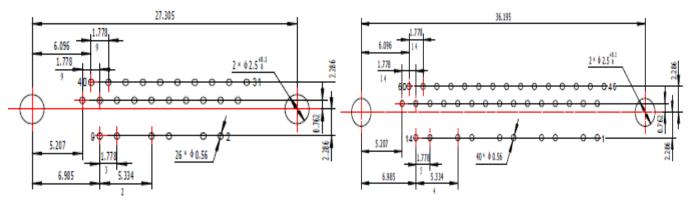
Dimensions of the direct printed board plug (without tolerance ±0.1)
